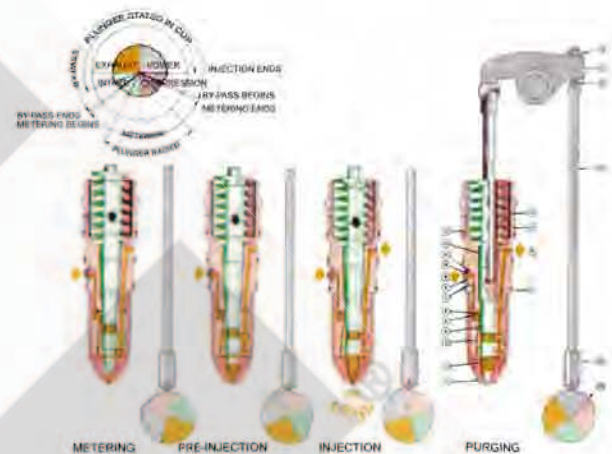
(FWC-29). Fuel injection cycle -PT (Type D) injector 5/16 inch diameter plunger
